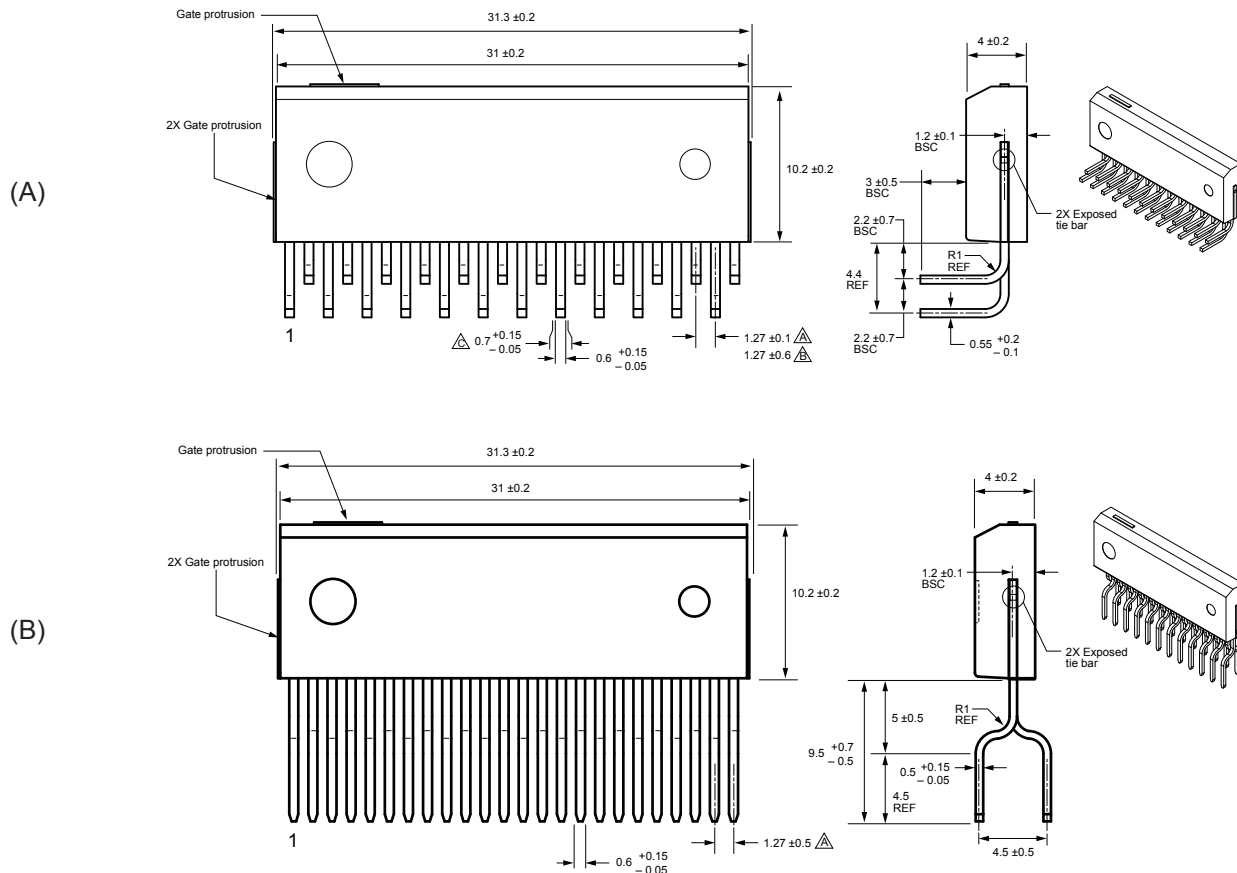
Package Outline Drawings. (A) LF2451, L-bend horizontal mount, (B) LF2452, vertical mount.
